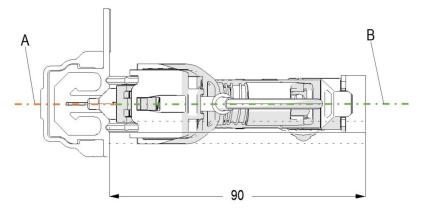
Collector mounting dimension from towing unit to bottom edge of rail
